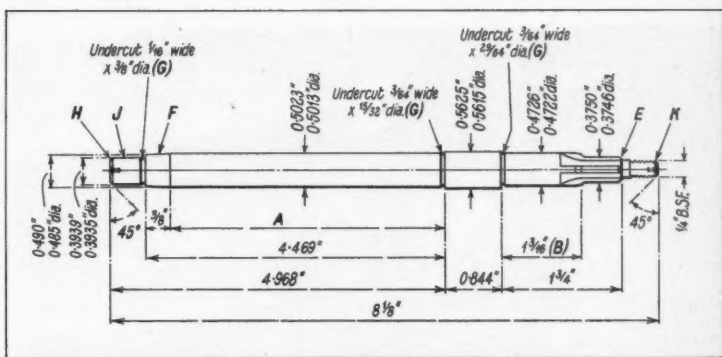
Typical shaft, showing principal dimensions and tolerances. Over-size blanks, for this shaft, and 12 others of generally similar design, are produced in 2½ min. to 3½ min. each
